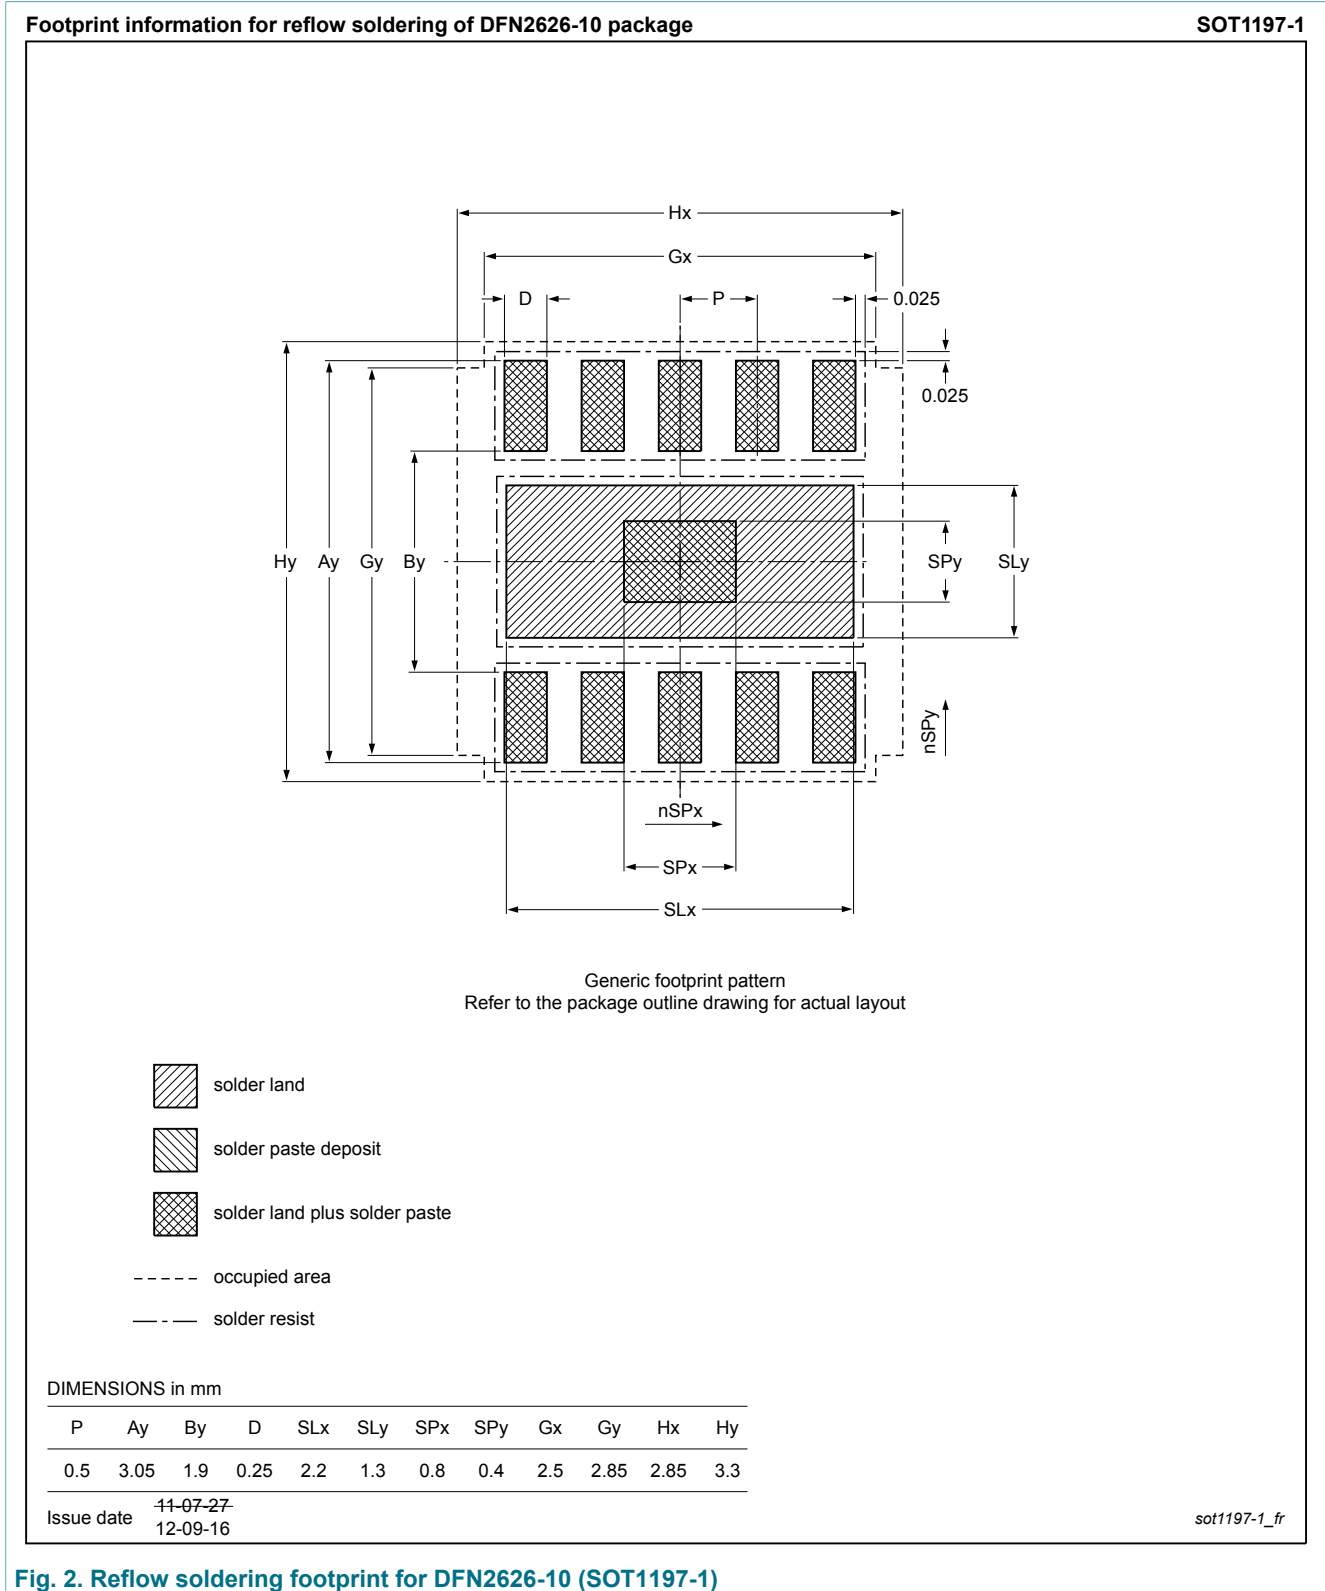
Reflow soldering footprint for DFN2626-10 (SOT1197-1)
